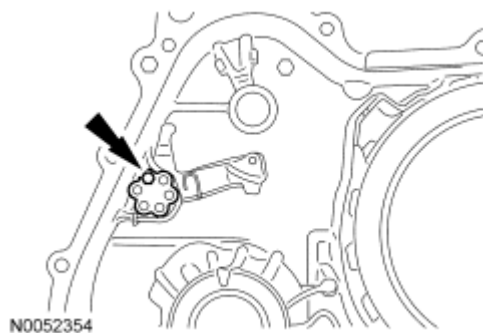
Parking Pawl Shaft Retainer & Bolt
